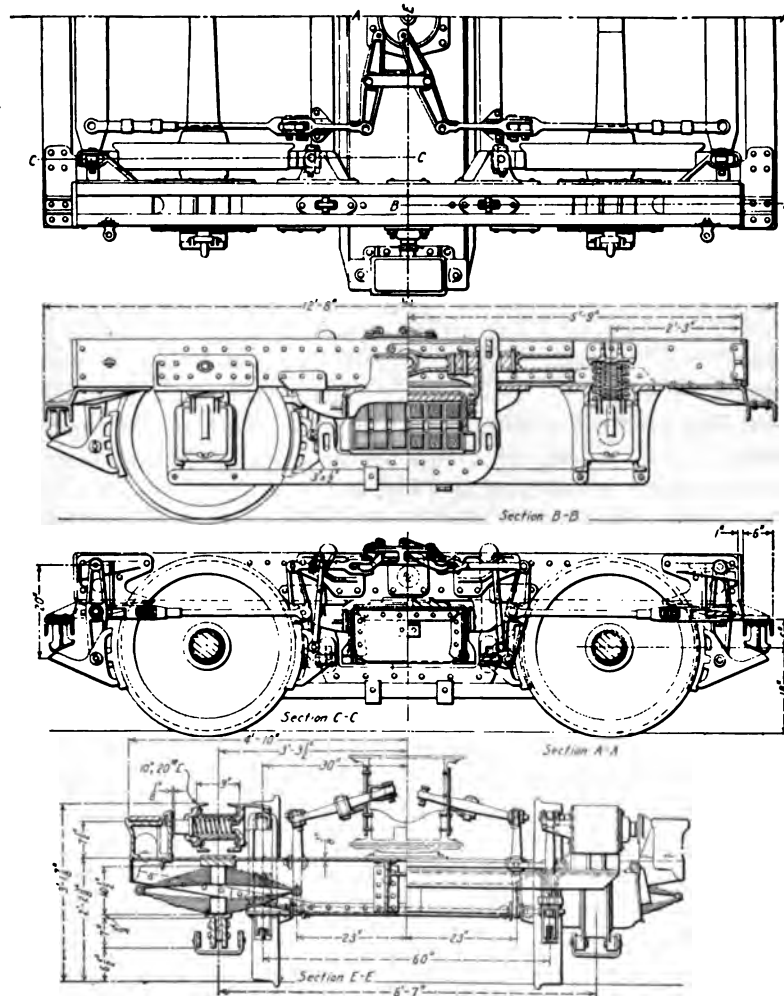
ORIGINAL FOUR-WHEEL STEEL PASSENGER CAR TRUCK WITH CLASP BRAKES APPLIED; PENNSYLVANIA RAILROAD
